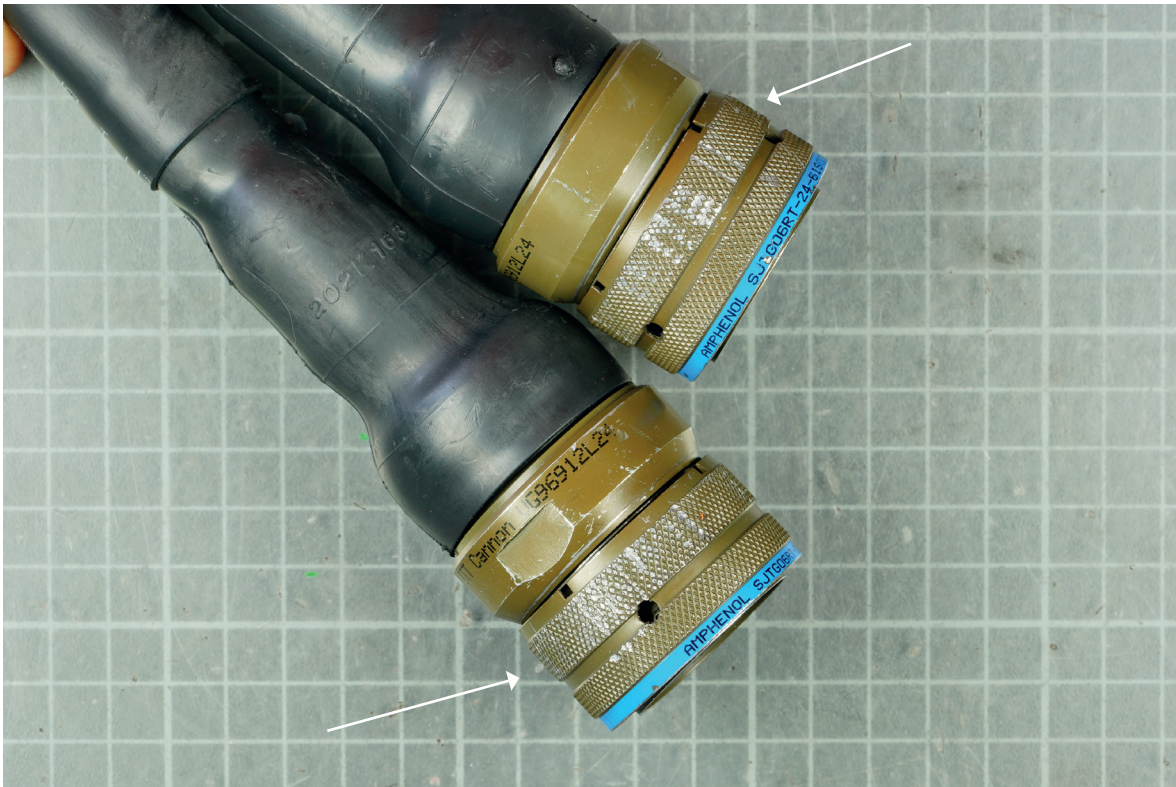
Tool marks on the union nuts. (Source: Technify Motors)
